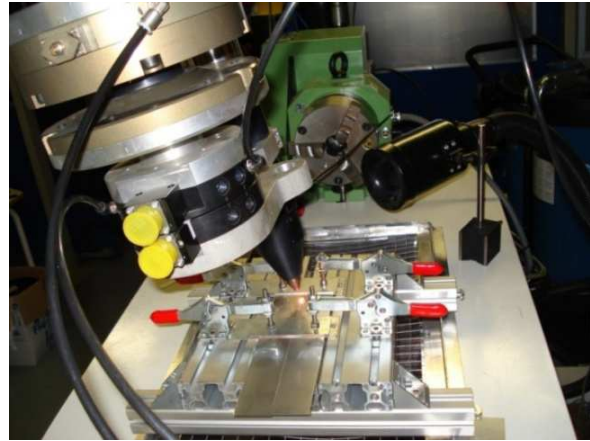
Experimental frame used to perform the experimental welding tests
